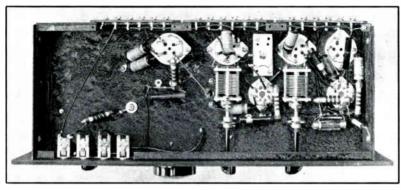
BOTTOM VIEW -- 75-WATT TRANSMITTER
